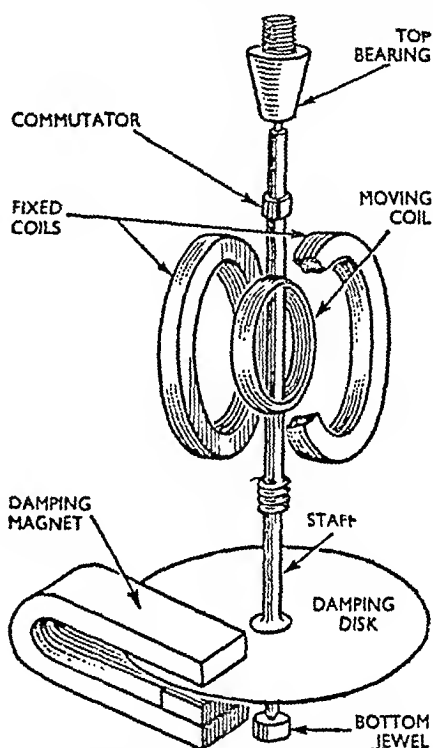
Showing component parts of a commutator-pattern watt-hour meter.
